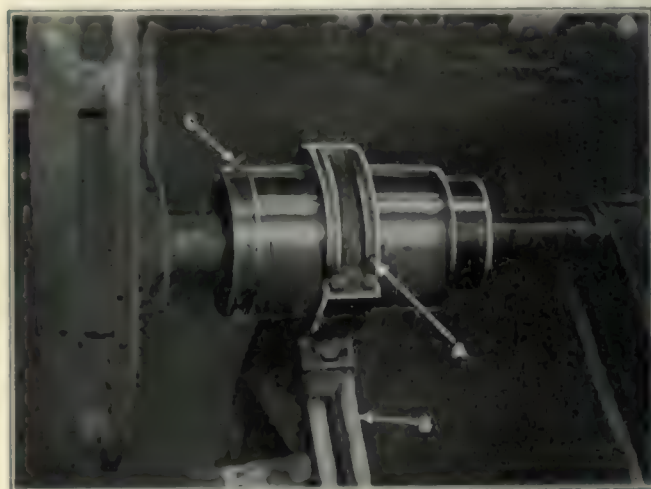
CRANK-PIN TURNING ATTACHMENT
